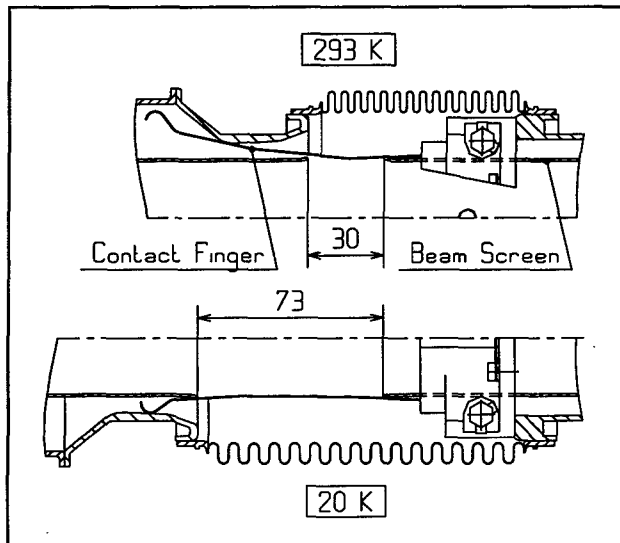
Section Through One Interconnect Line, Showing the RF bridge with the Beam Line at 293 K (Installed Position) and 20 K (Operating Position).
